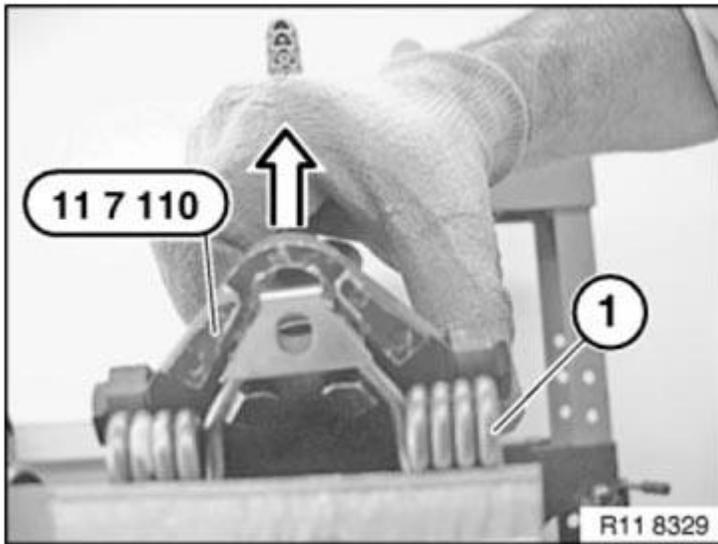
Positioning Special Tool (11 7 110) On Return Spring
